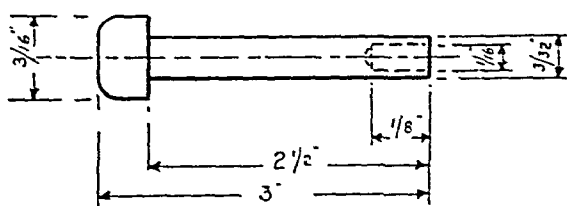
TURNING A STEEL COMPONENT. SINGLE-SPINDLE AUTO. WORK
